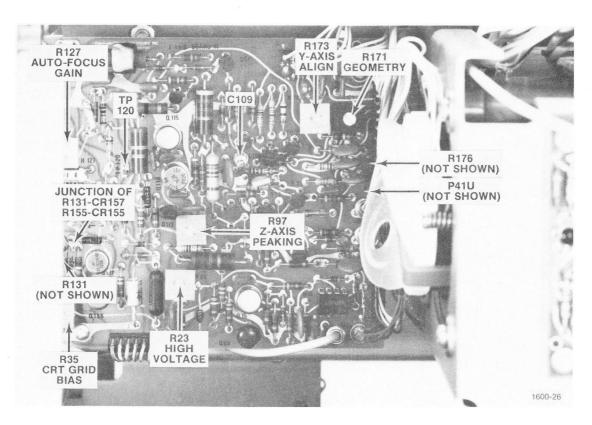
D7704 Z-Axis board adjustments and test points.
